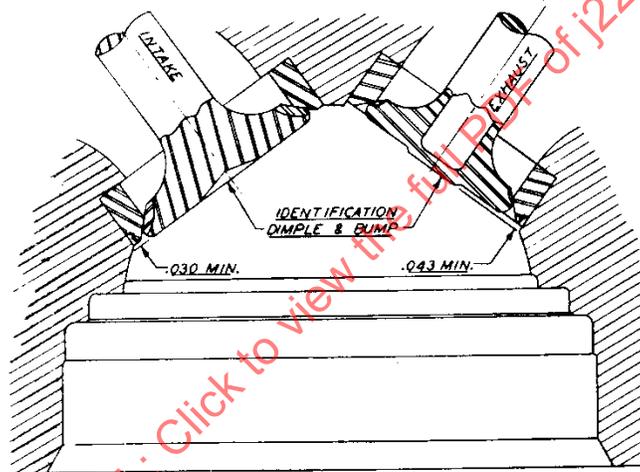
PROPER VALVE SEATING WITH REFACED VALVES AND REGROUND SEATS
